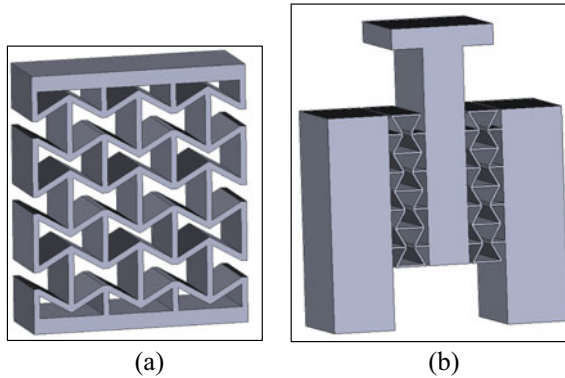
Representative CAD models a compression test specimen b shear test specimen
